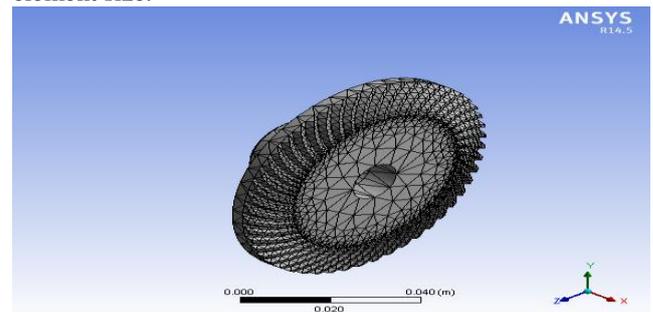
FE model of spiral bevel gear generated in ANSYS
